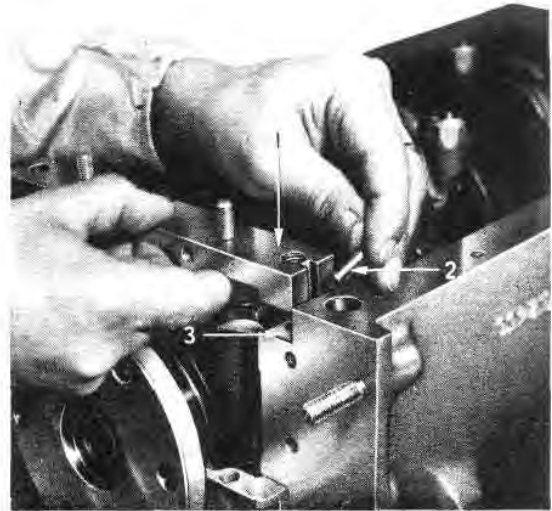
Re-fitting the Cylinder Block Bridge-Piece
